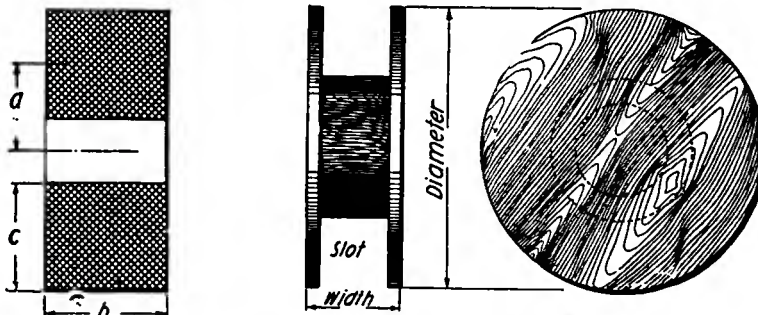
Dimensions used in the formula. Figure 2—Constructional details of block used for winding the coils
